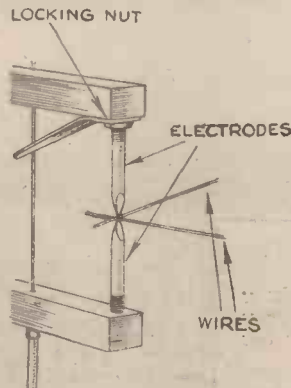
Electrodes welding two wires at right-angles.
